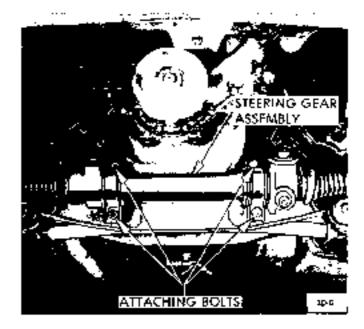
D-6 Steering Gear Assembly Attaching Bolts
